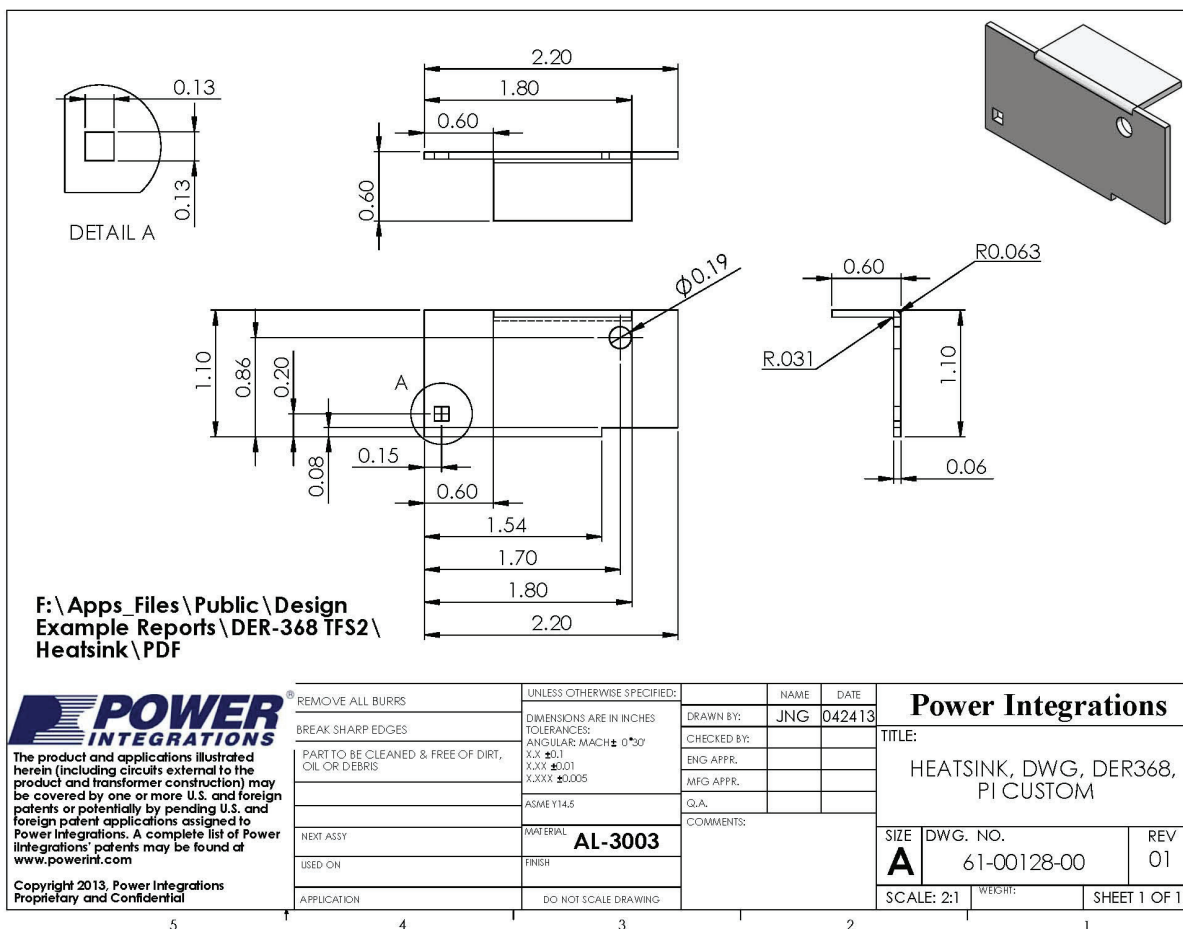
Primary Heat Sink Sheet Metal Drawing.
